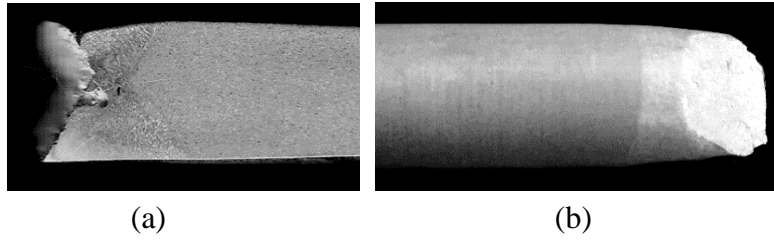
Fractured Type II tensile specimens (a) Cross-section of as-welded, (b) FSPed weldment.
